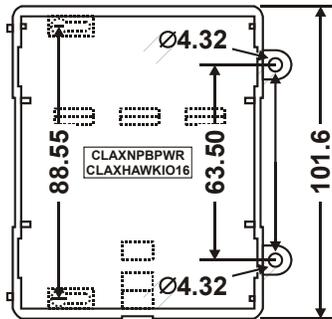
Tab mounting of CLAXNPBWR / CLAXHAWKIP16
